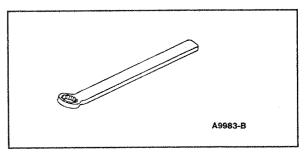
T86T-9000-C Injection Pump Mounting Wrench
